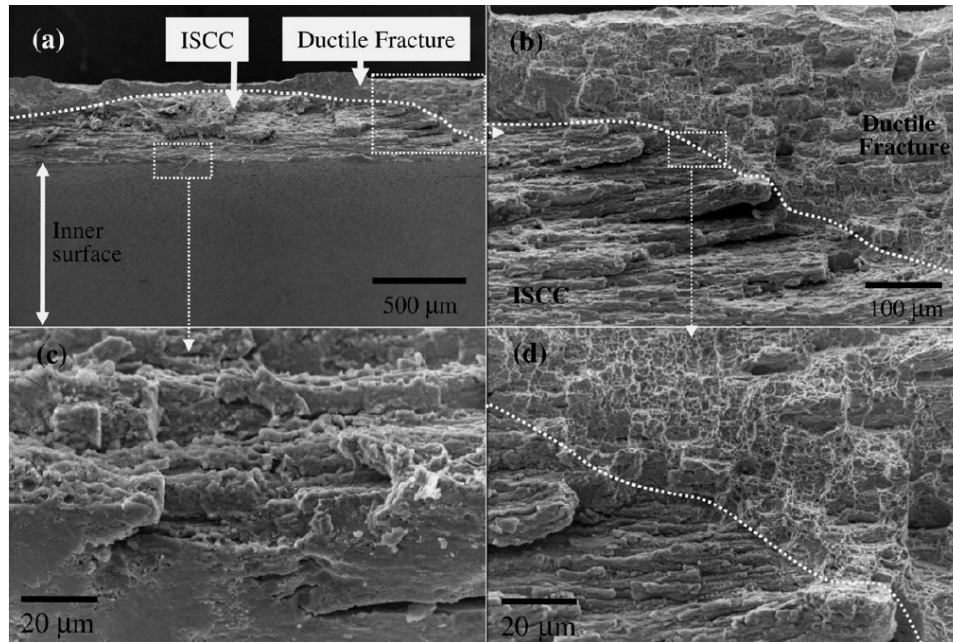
Fracture surface for iodine SCC in unirradiated Zircaloy-4 from an initially smooth surface, the crack shape is roughly elliptical [37]
